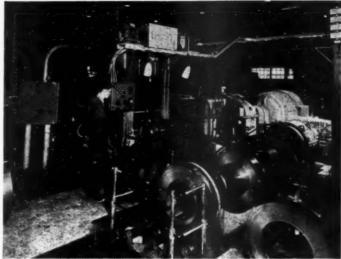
View from the entry side of the mill, showing the 200 h.p. mill motor and 50 kW. drag generator.
